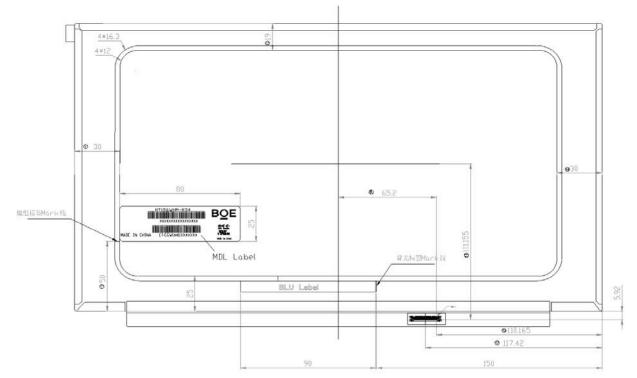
TFT-LCD Module Outline Dimensions (Rear view)
